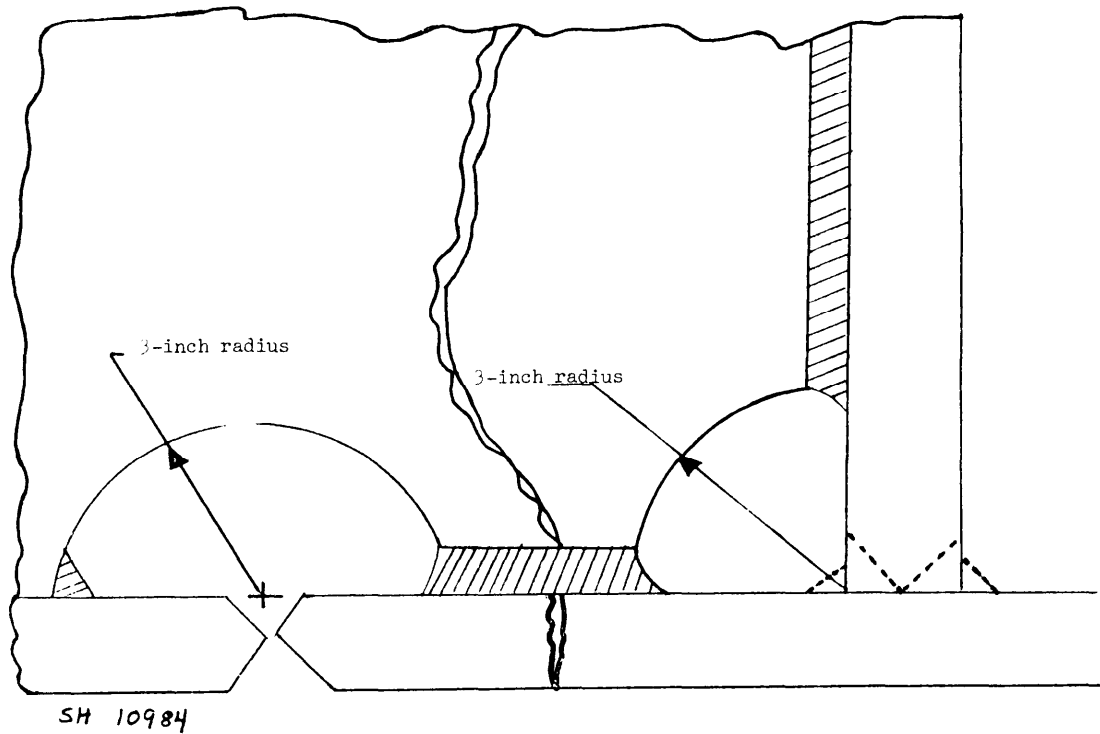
Insert patches and small access plates which cross existing butt welds.
